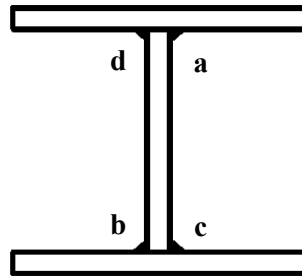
shows the welding setup for a welded H-section. Both the flanges and the web of the H-section were first temporarily spot welded and fixed with run-on plates. The sections was rotated  $45^\circ$  for the SAW process. Preheat with electric heating panels was carried out before welding. In order to minimize any welding-induced distortion, the welding sequence of a total of four grooves was designed as shown in Figure 6.2 (b), and a small lifting machine was used to rotate the section after finishing each groove. The welding parameters of typical weld pass were recorded and tabulated in Table 7.2.
